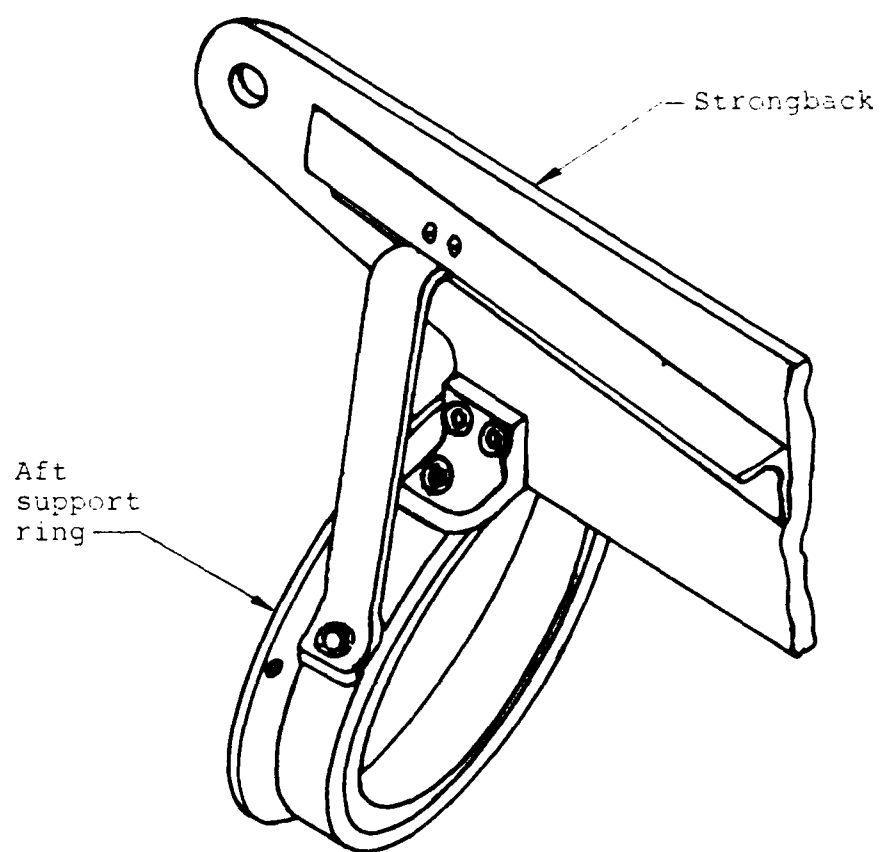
AFT RING - STRONGBACK ASSEMBLY
